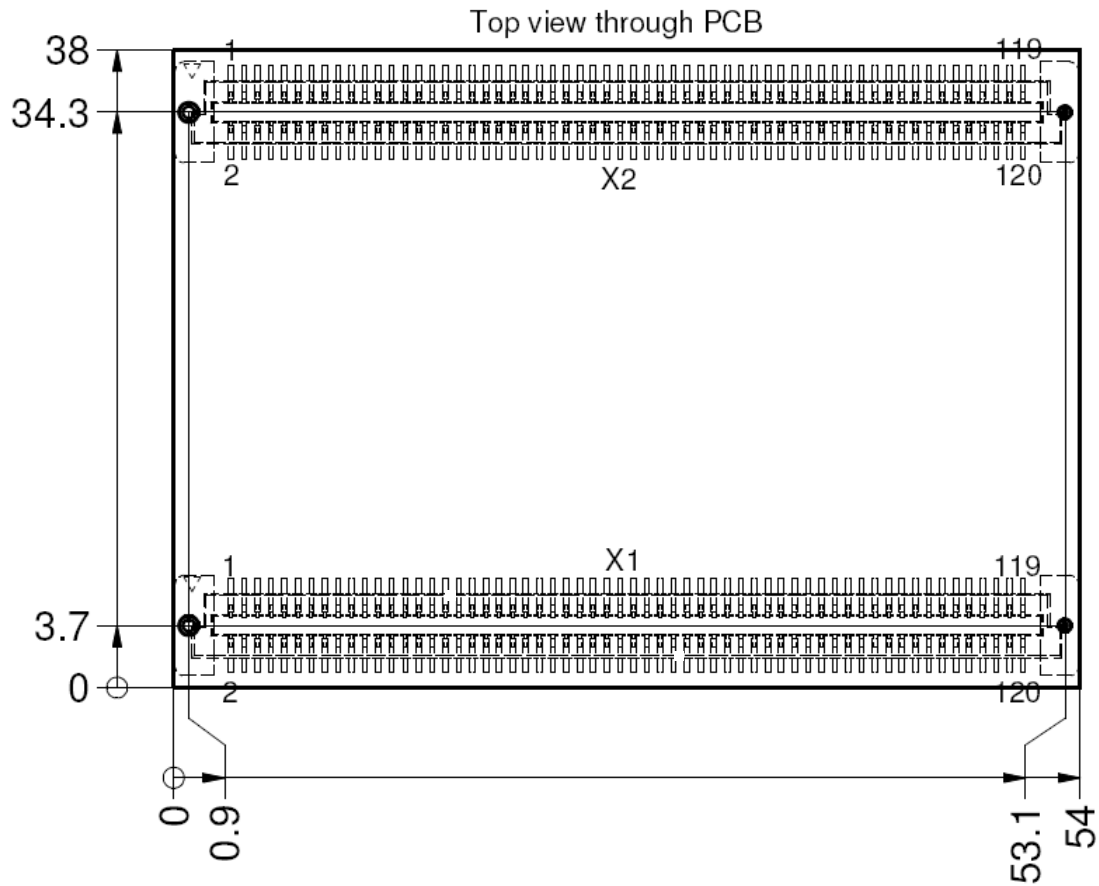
TQMa335x dimensions, top view through TQMa335x
